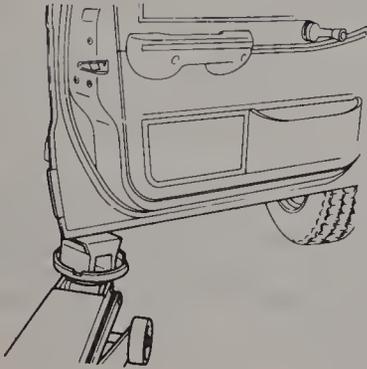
Support the door with a floor jack during removal and installation (Sec 14)
